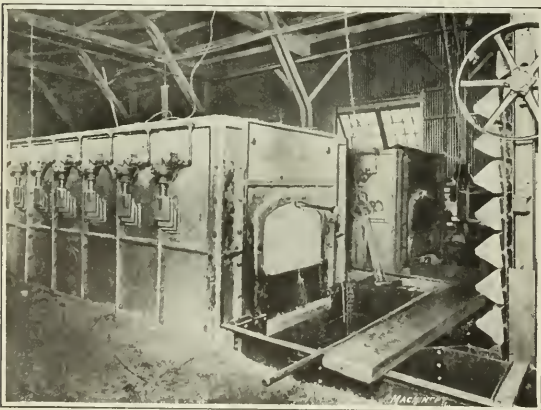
Discharge End of Hardening Furnaces. Hot Shells pushed out into Oil Quenching Tank and carried by Conveyor to Drain Tables, then fed into Tempering Furnaces
